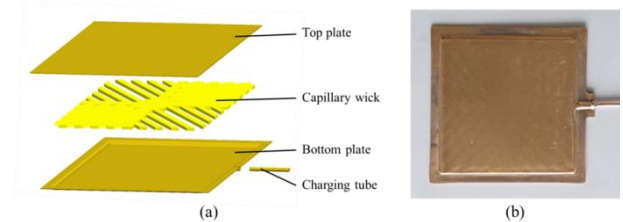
The proposed vapor chamber: (a) exploded view; (b) a photo after bonding.
